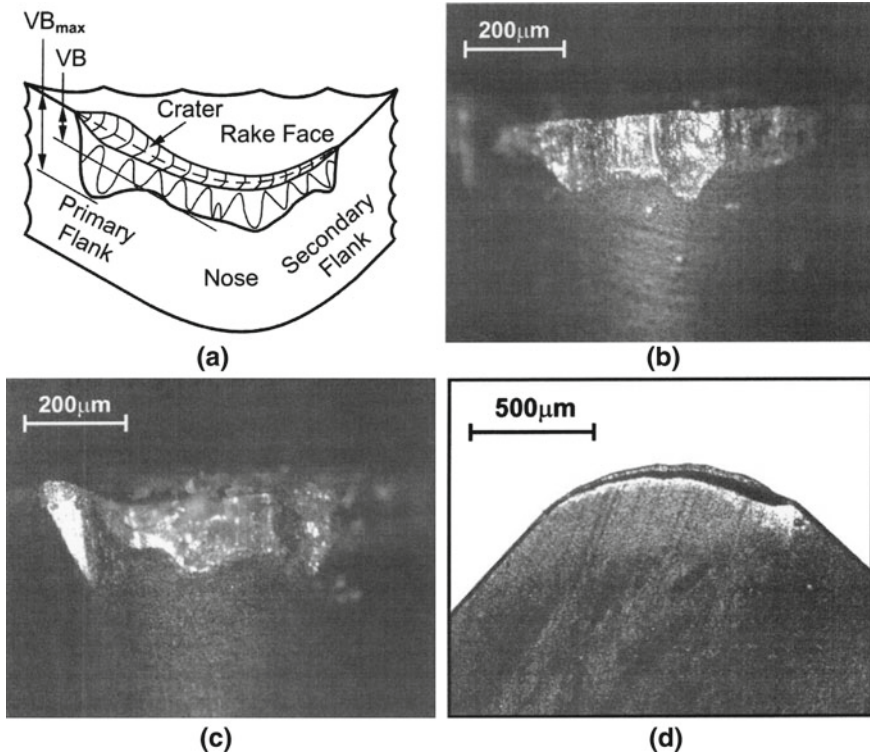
a Schematic of tool wear, wear on the b nose, c flank face, and d rake face during LAM of PSZ at material removal temperature of 1,000°C [76]
